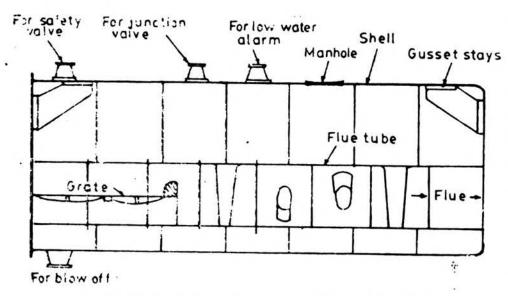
Longitudinal section of the shell of a Cornish boiler.
